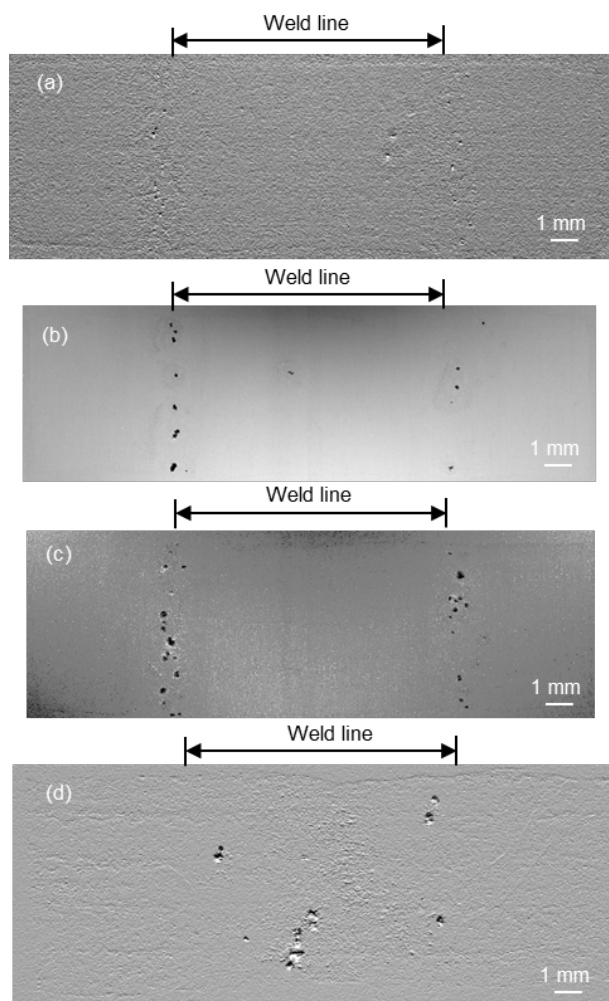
Corroded surface of FSW specimen (a) 24-, (b) 48-, (c) 72-, and (d) 96-h exposure
